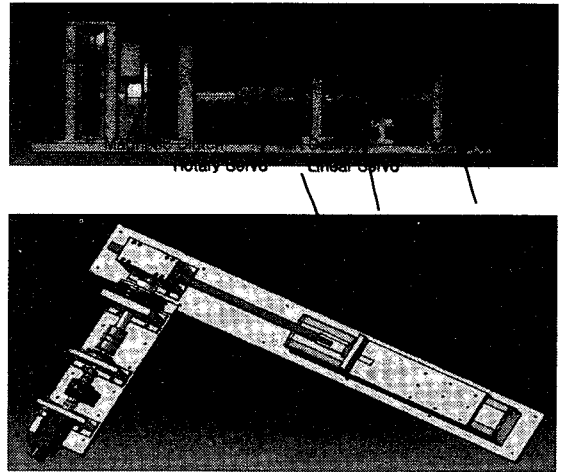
Design of rotary and linear motor dynamometer using CATIA
